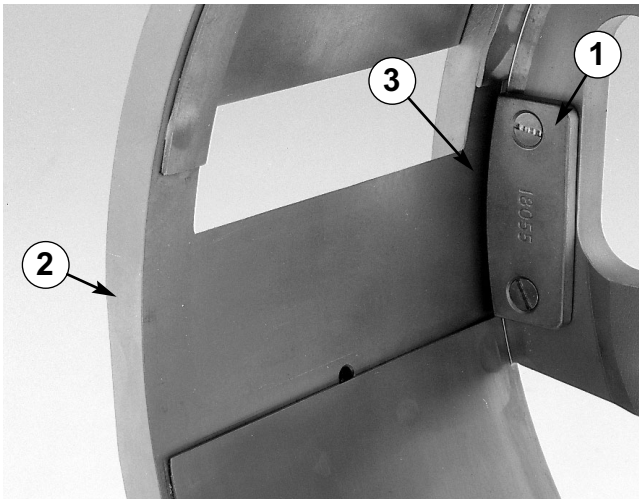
Slicing knife area. (1) Slicing Knife Holder, (2) Slicing Case, (3) Slot.
